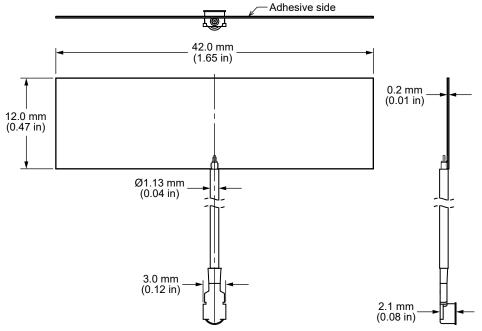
ANT-5GMFPC1-UFL-100 Dimensions
